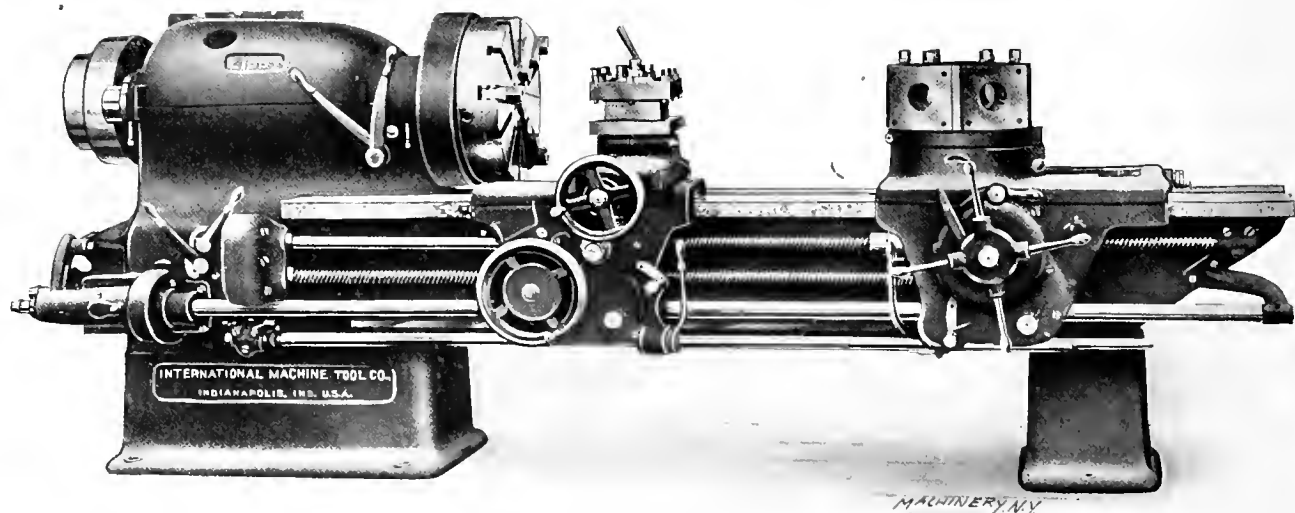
Libby Turret Lathe, made by the International Machine Tool Co., Indianapolis, Ind.
